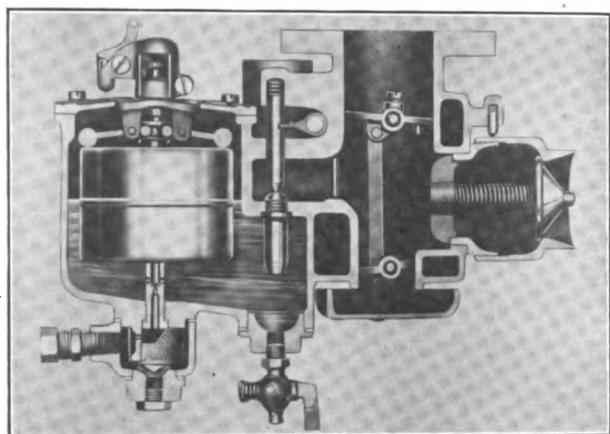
Sectional View of Model A Rayfield Carburetor, a Water Jacketed Type.
